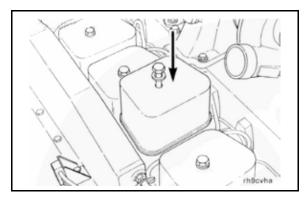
INSTALL THE ROCKER LEVER COVERS
